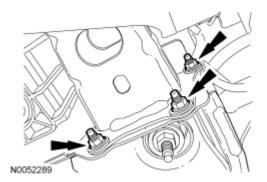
Locating LH Subframe-To-Lower Bumper Nuts Courtesy of FORD MOTOR CO.
